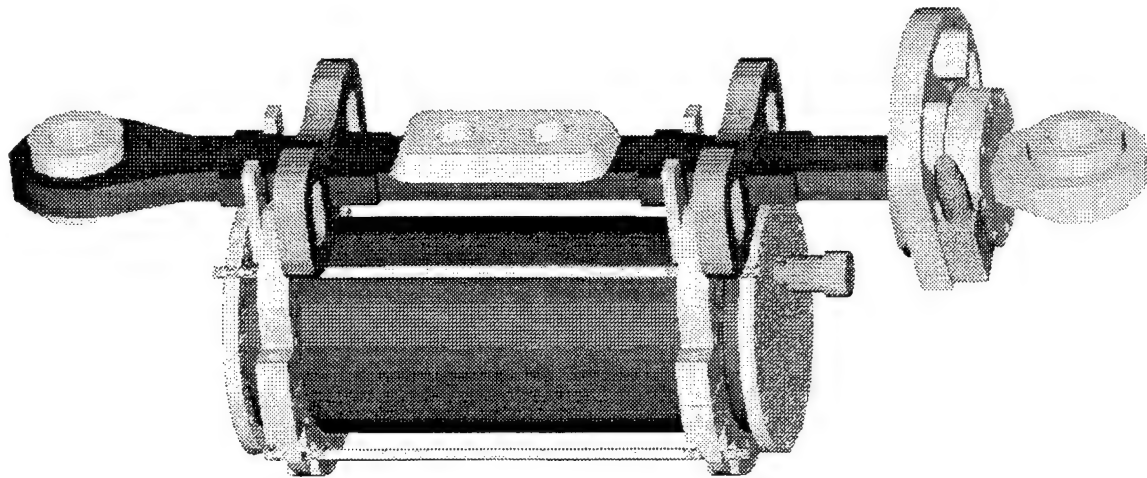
Schematic view of pressure case mounted in strongback. The c-shaped hooks have been slid into final position ready for the rubber blocks to be moved into place, and for the screws to be installed.
